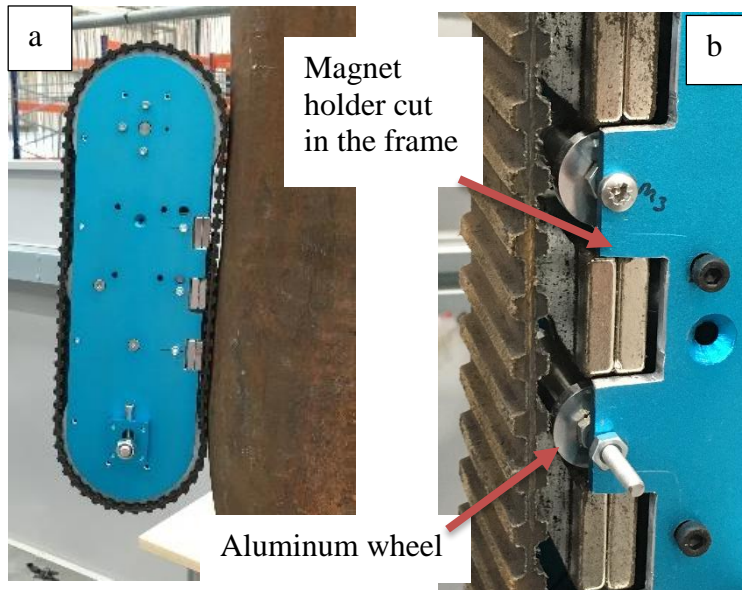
Prototyped tracked-wheel unit. a- magnet inserted tracked wheel unit = b – small cuts in the frame and aluminum support wheels.
